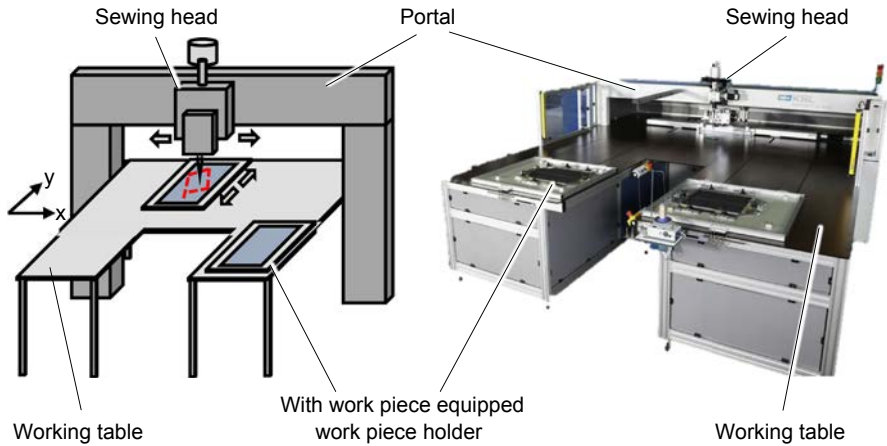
Computer numerical control sewing factory with two workpiece holder for a fast change of the workpiece.
